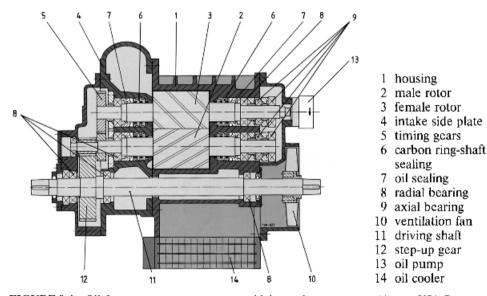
Small packaged rotary screw compressor. (Aerzen USA Company, Coatesville, Pa.)
